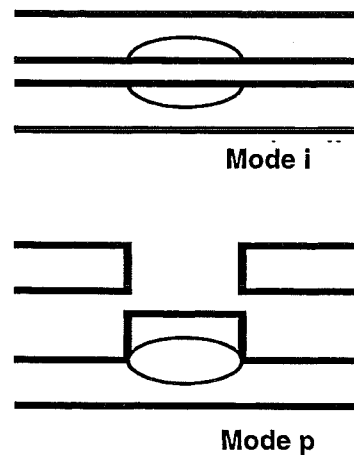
Two types of weld failure mode-i (interface failure) and mode-p (plug).
